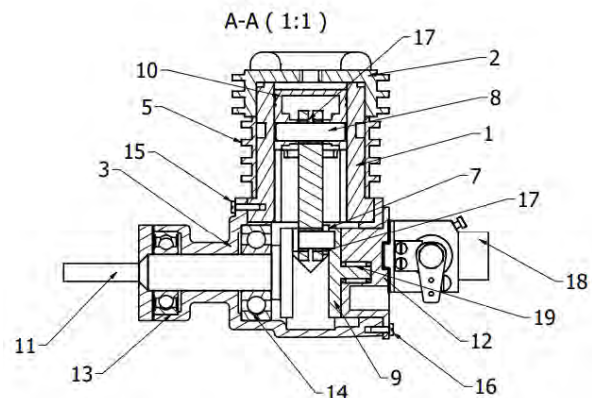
Cross-section of a typical two-stroke glow engine, fragment of the assembly drawing [12]
